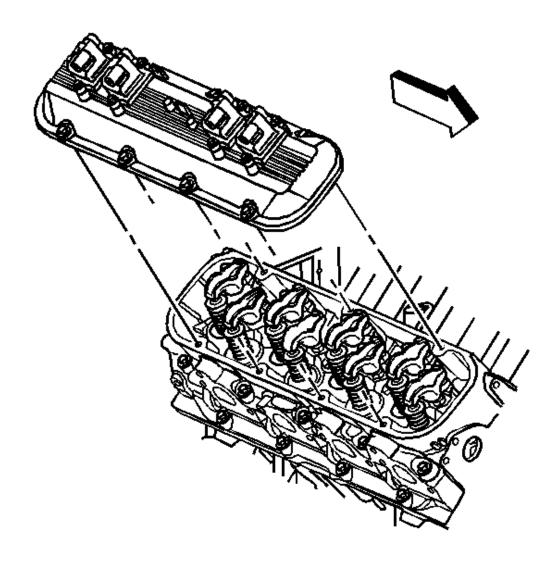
View Of Valve Rocker Arm Cover (Right) Courtesy of GENERAL MOTORS CORP.
